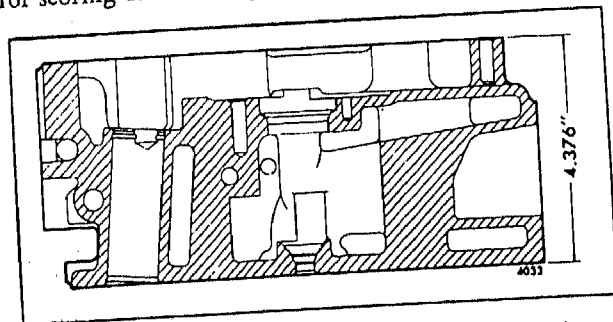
Minimum Distance Between Top and Bottom Faces of Cylinder Head
